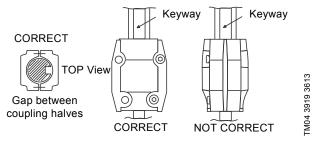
Coupling adjustment all CR, CRI, CRN, CRT
